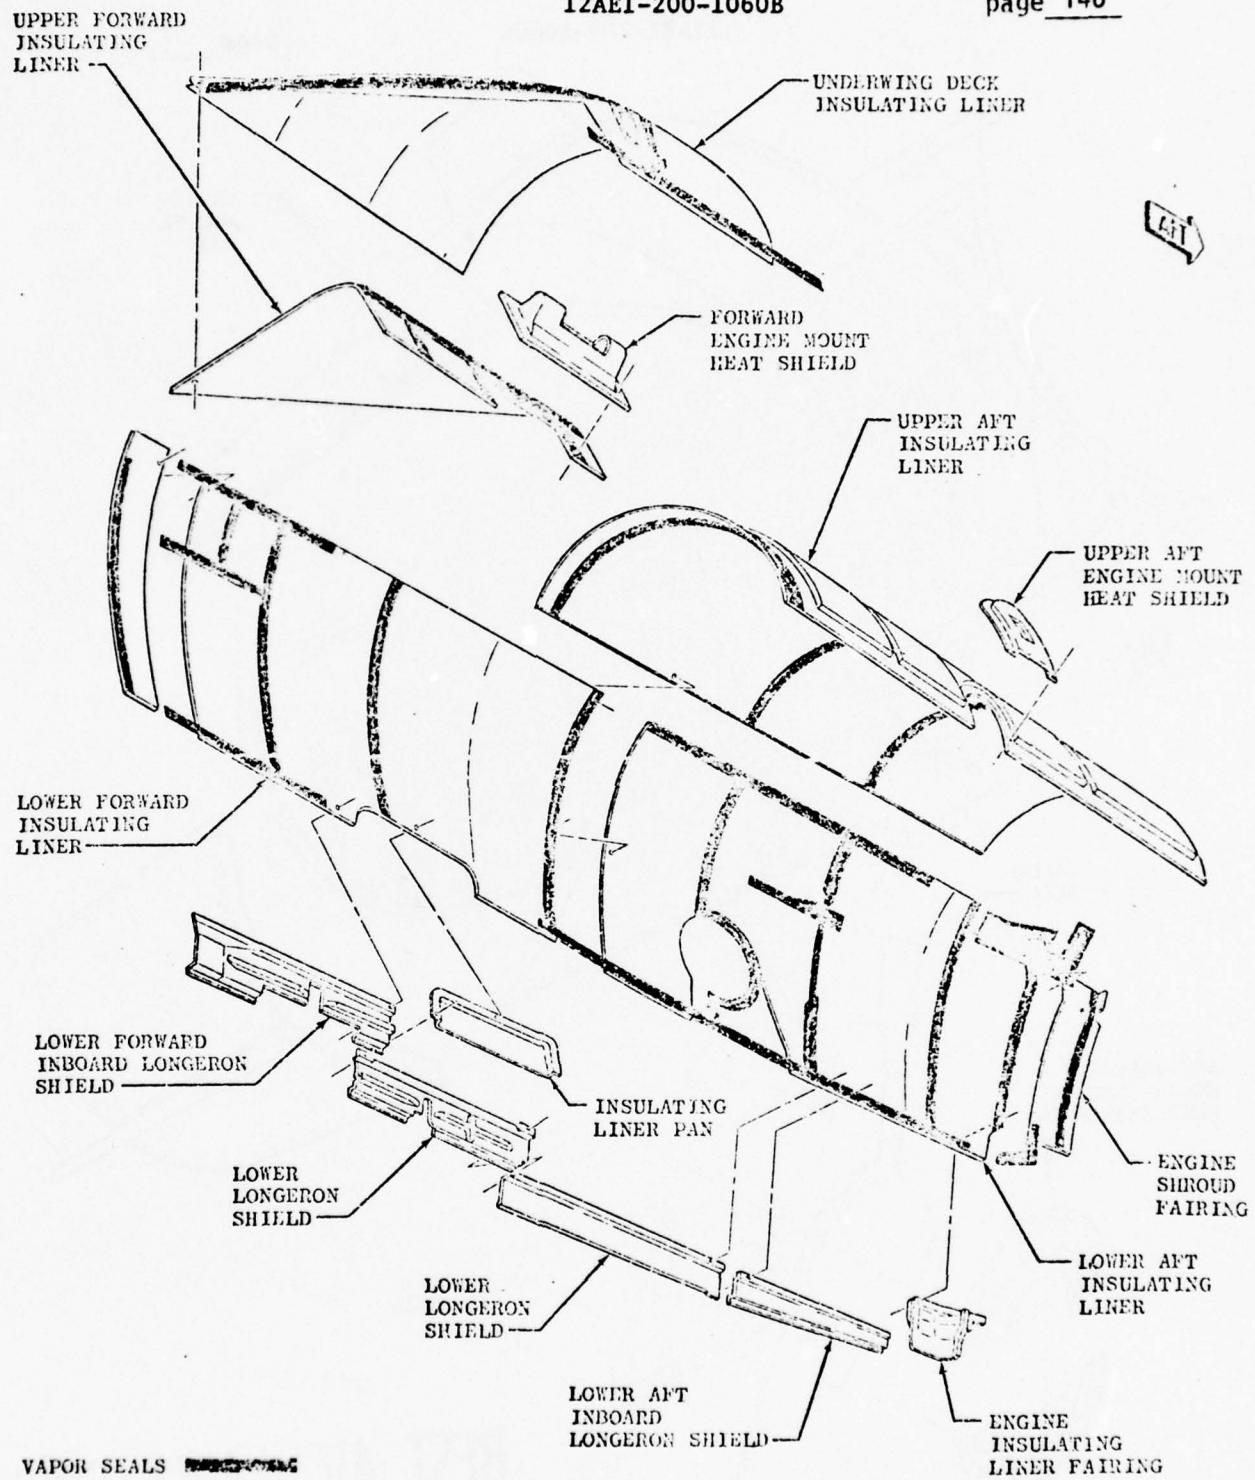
Engine Insulating Liners, Heat Shields and Vapor Seals (Sheet 2)
